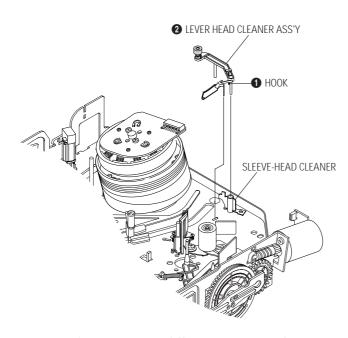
Lever Head Cleaner Ass'y Removal
